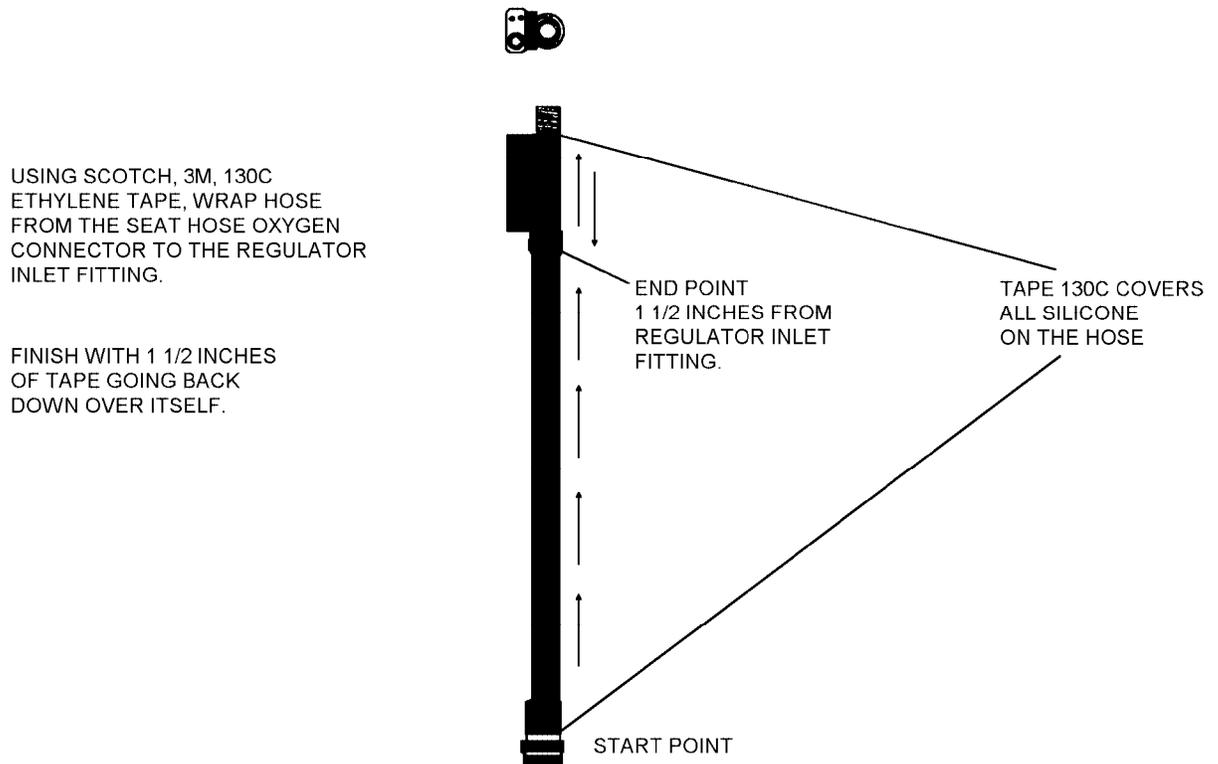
Modified Regulator to Seat Kit Hose Assembly Taping
